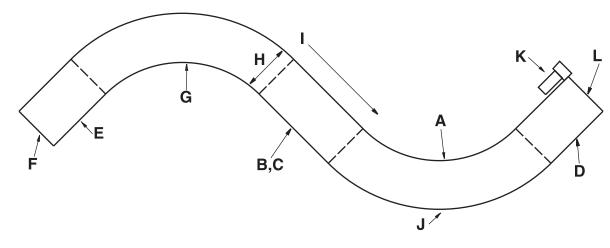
TYPICAL 2-TURN RADIUS LAYOUT
